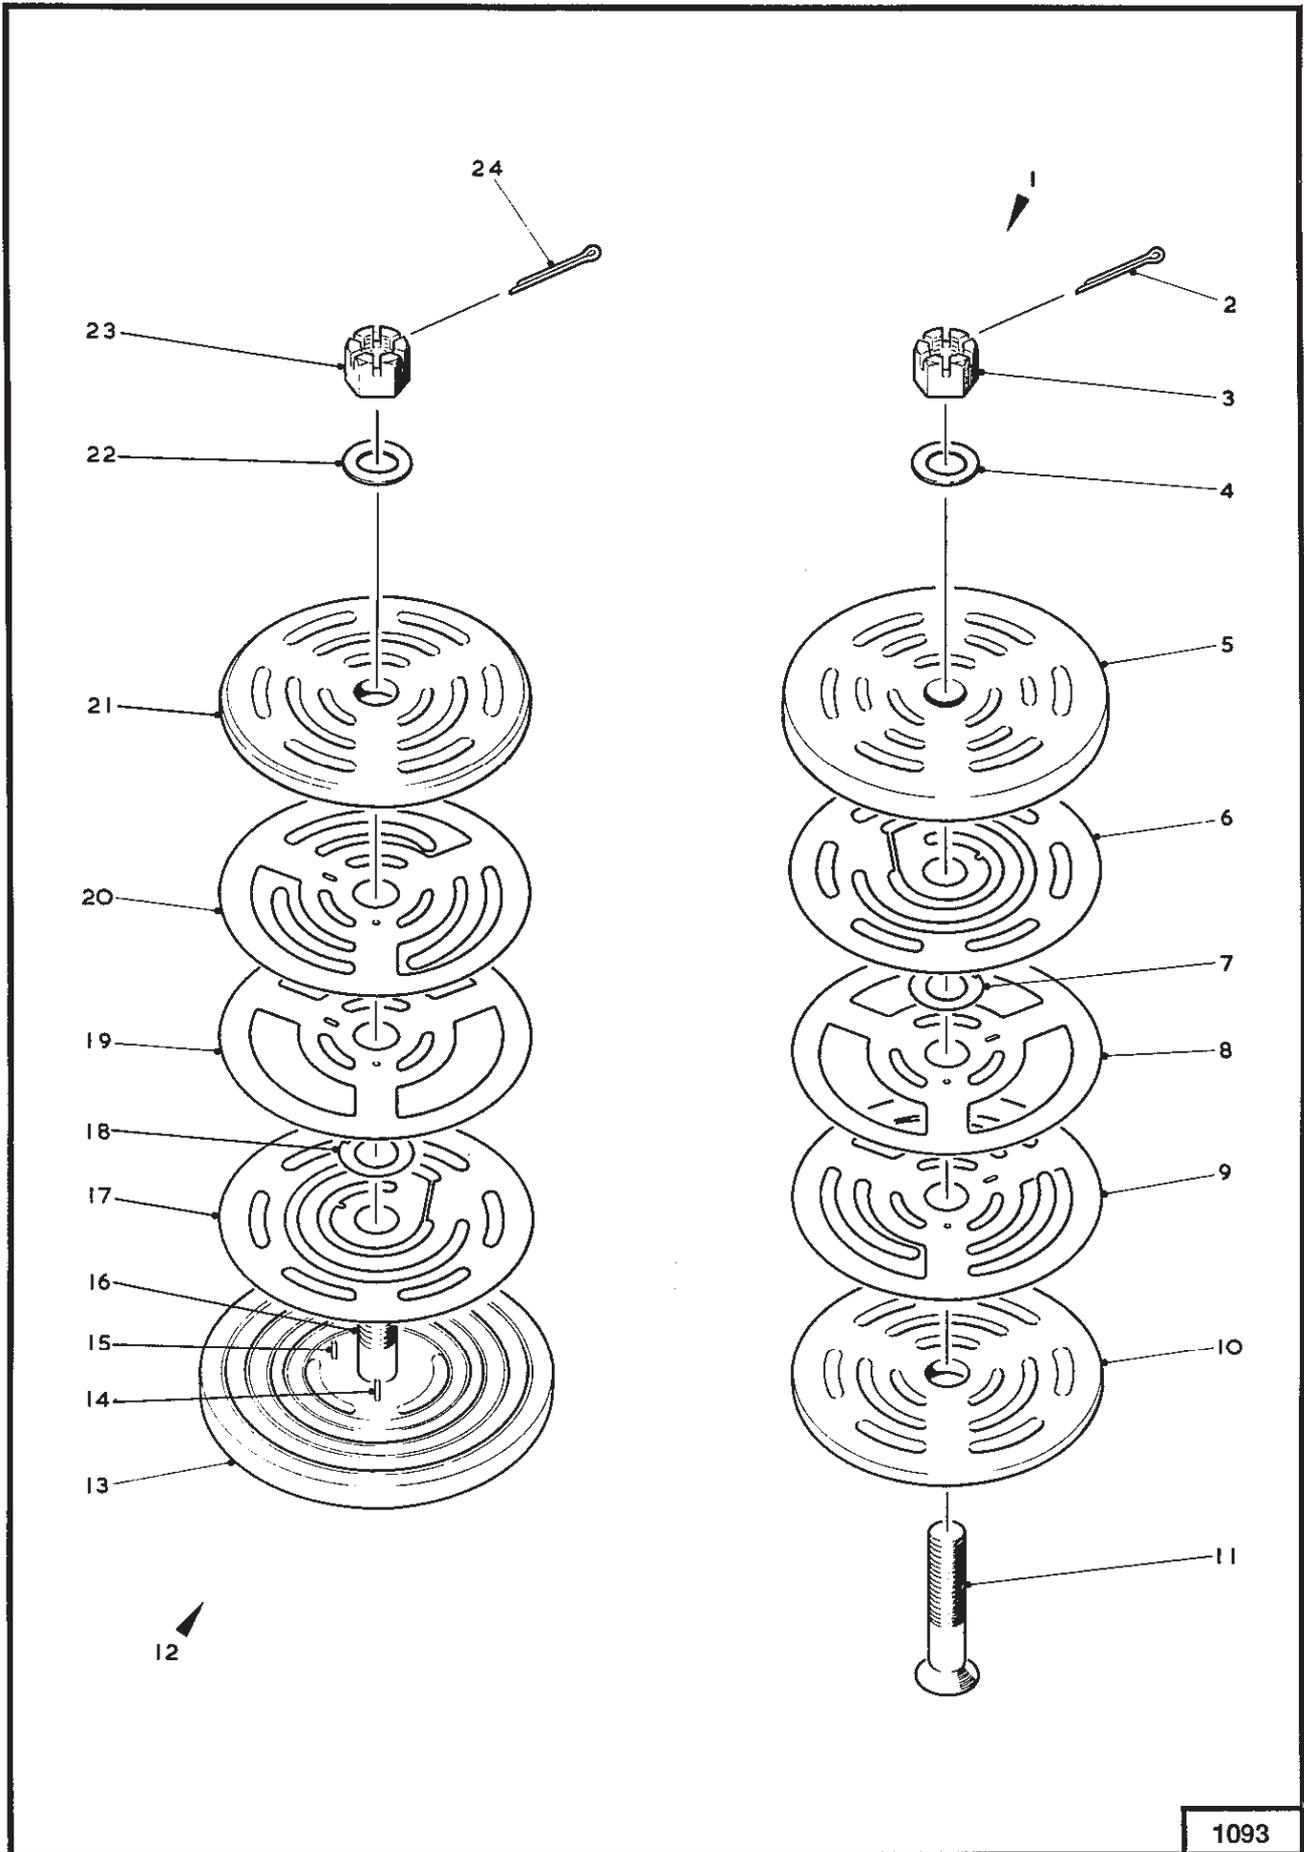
HP SUCTION/DELIVERY VALVE ASSEMBLIES
